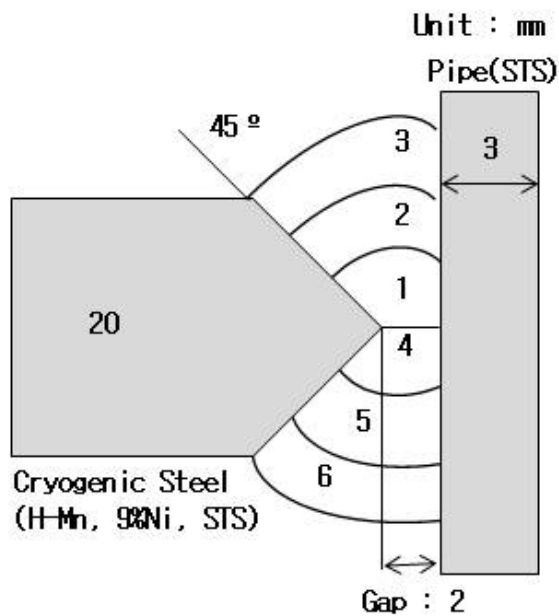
Weld joint configuration and weld sequence
